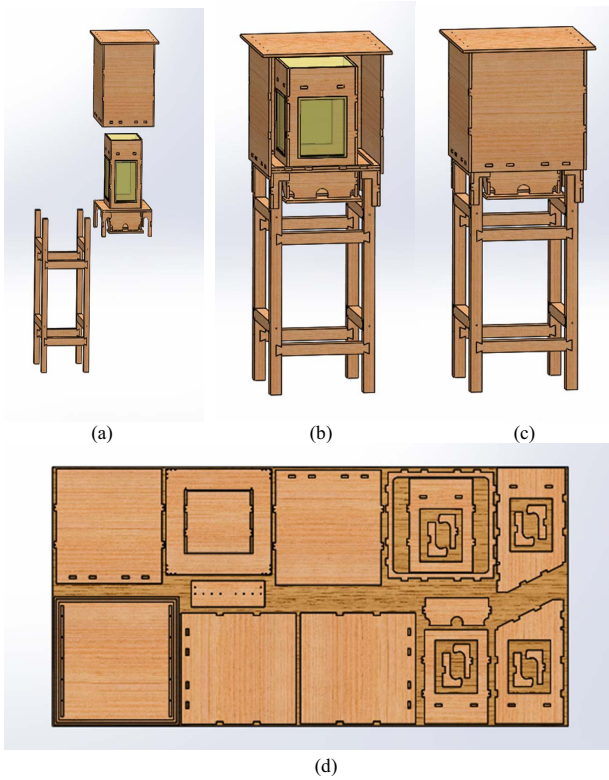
Design of the physical body of our novel hive : (a) Individual components : cover, body and stand; (b) Assembled, but with front cover removed for inspection; (c) Assembled, with full cover fitted; (d) Design of components all on a single sheet of weather-resistant fibreboard, ready for laser cutting.
